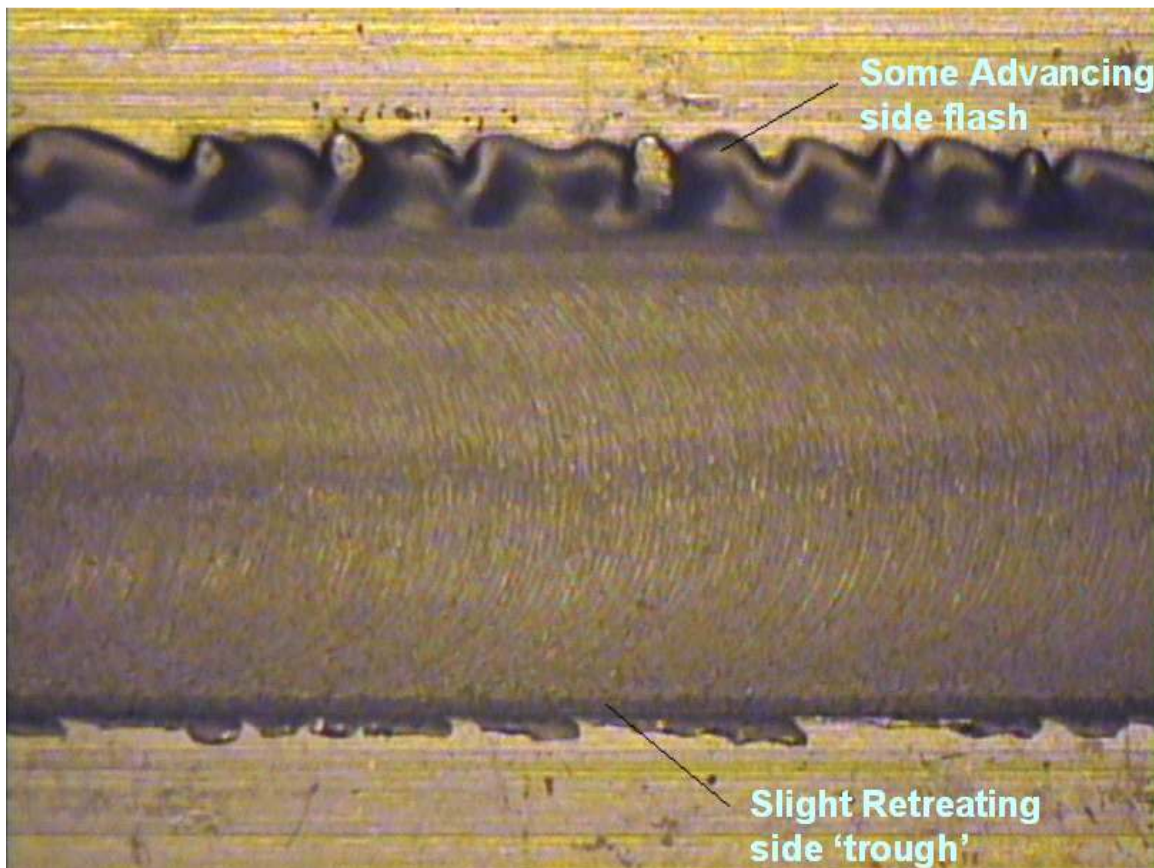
Typical surface appearance for 90° conical tool welds on 1/8" thick butted 6061 alloy aluminum plates. Typical conical surface defects are pointed out.
